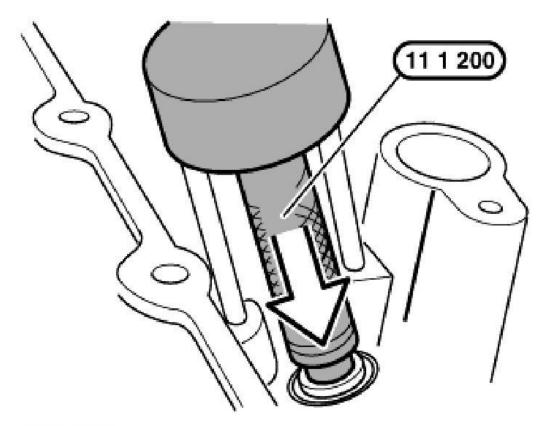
Installing Assembly Sleeves (S50 B32 And S54) Courtesy of BMW OF NORTH AMERICA, INC.
